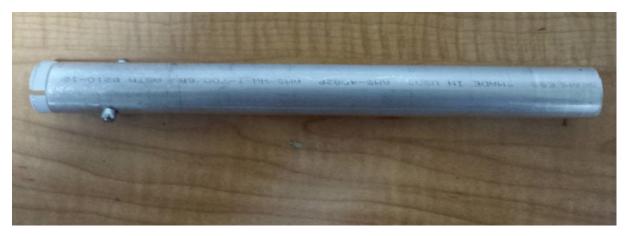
Telescoping tube for Main Shaft with Snap Buttons
